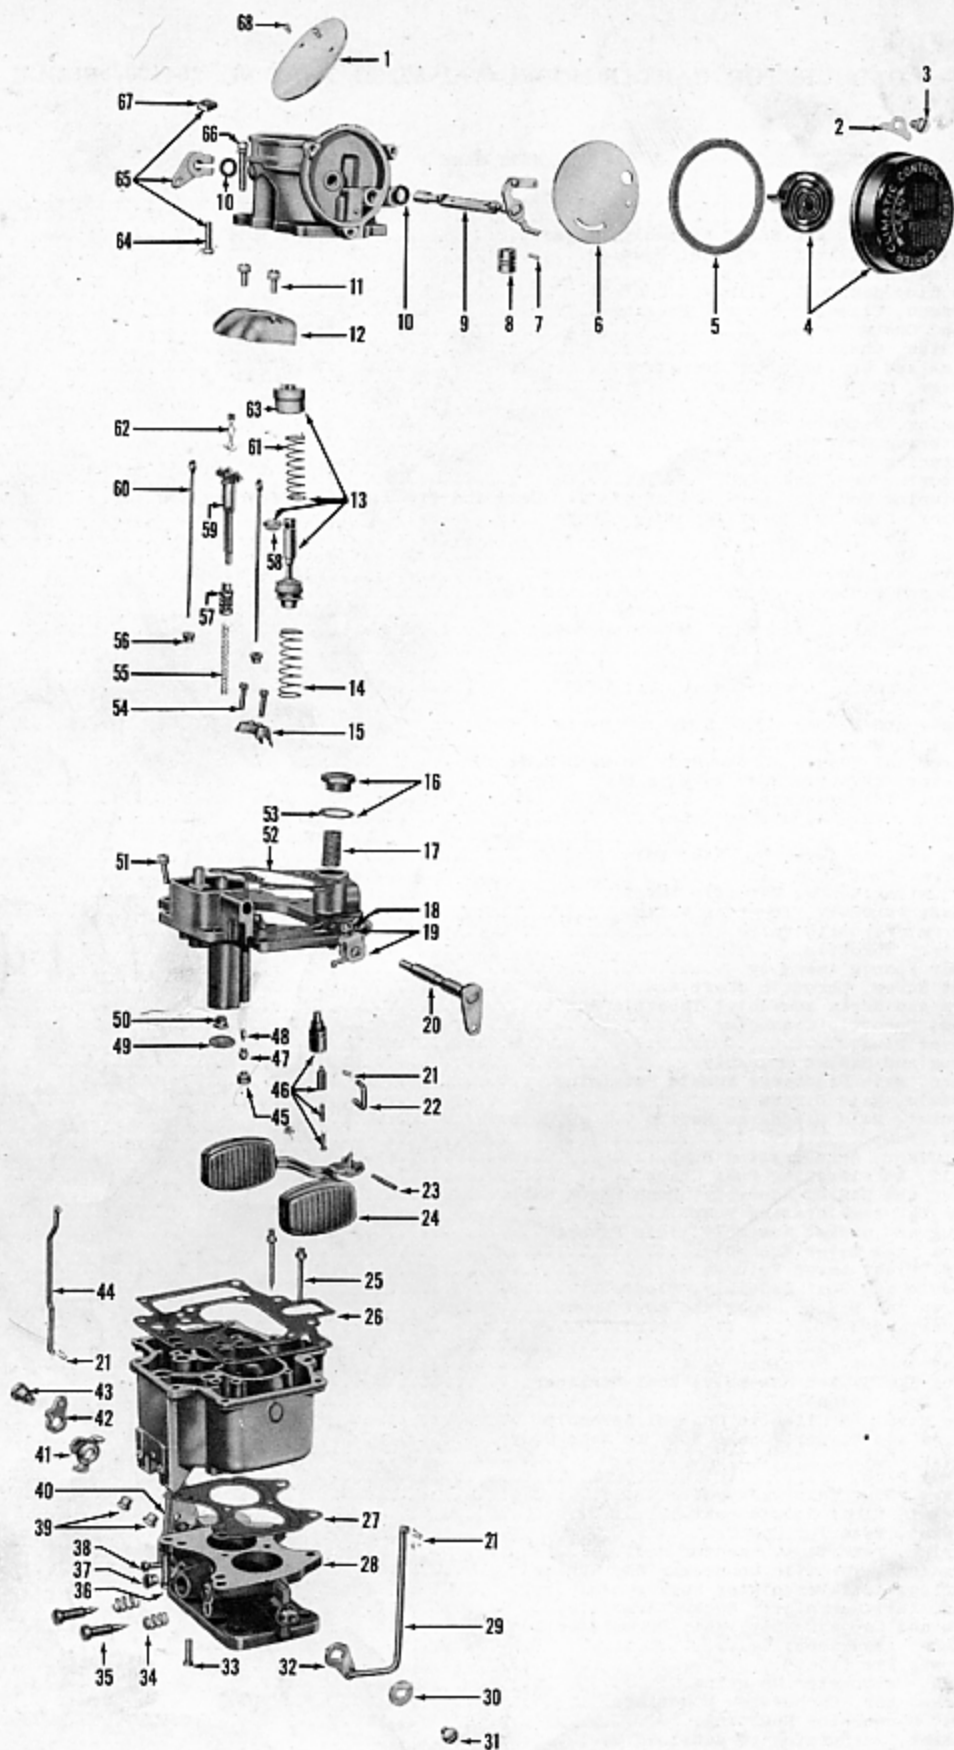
CARBURETOR, CARTER MODEL WCD-685SA, PART NO. 203354, DUAL MANIFOLD ENGINES
